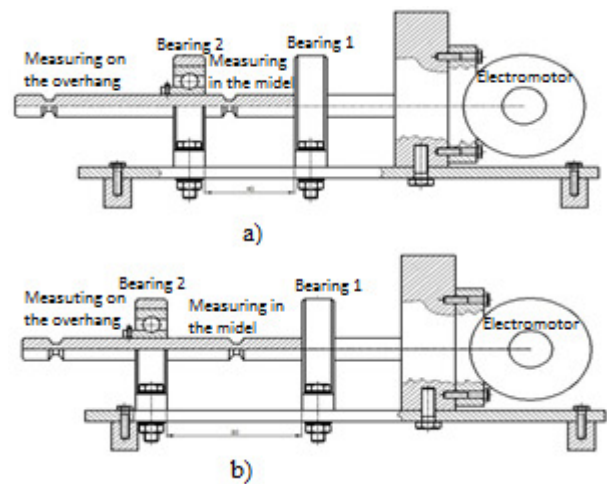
Position of the bearings in eccentricity measurements: a) Position of gathered bearings, b) Position of widespread bearings
